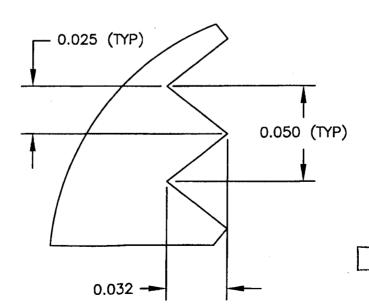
DETAIL B: RIDGE DETAILPARTIAL SECTION
